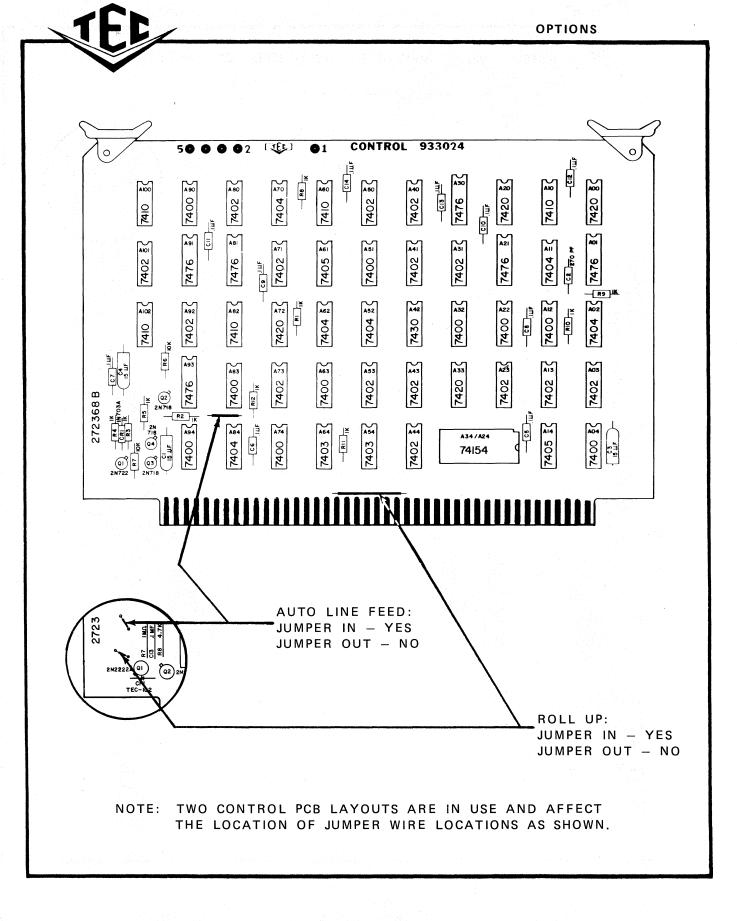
JUMPER WIRE OPTIONS ON MODELS 450, 455, 456 CONTROL PCB
